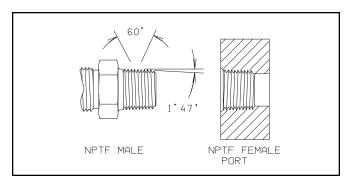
Dryseal American Standard Taper Pipe Thread — NPTF
